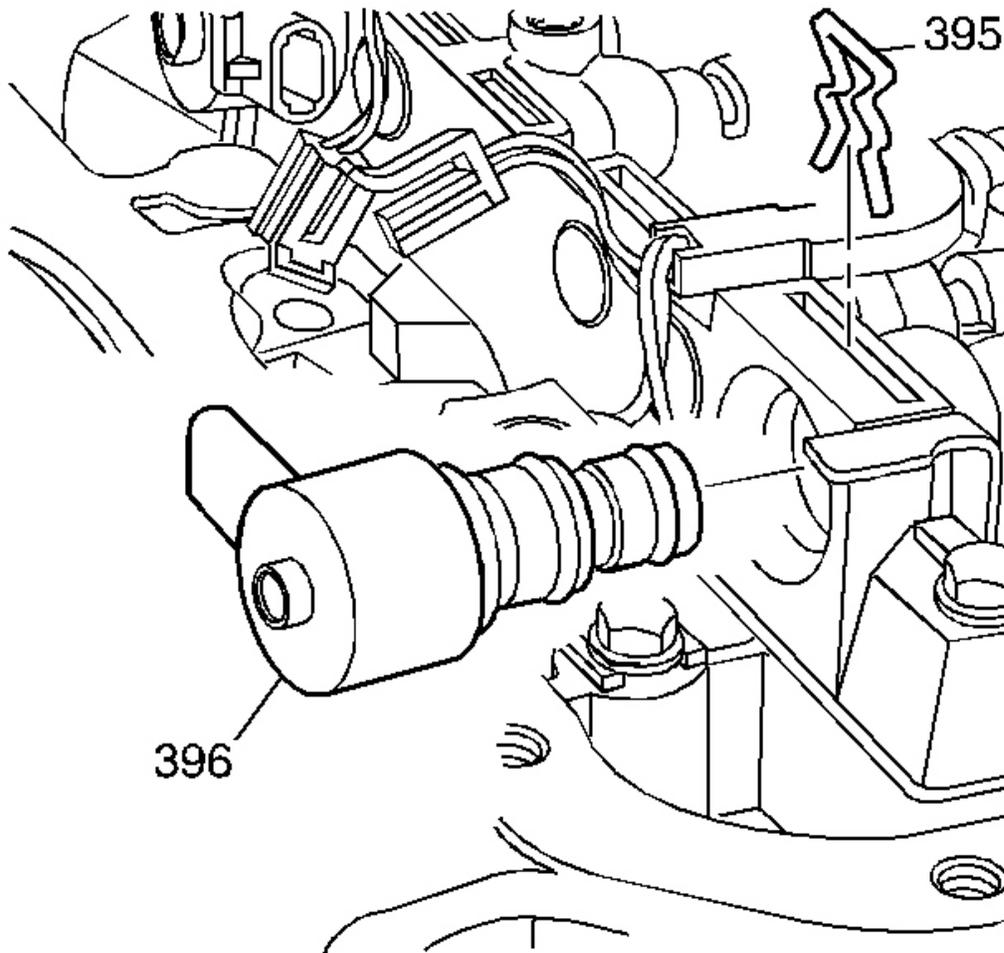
TCC PWM Solenoid Valve & Solenoid Retainer
